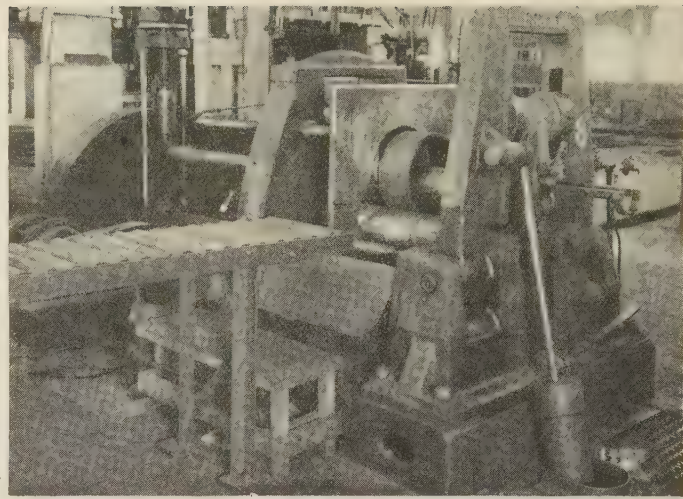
Rolling machine for forming steel slabs into rings for motor frames
